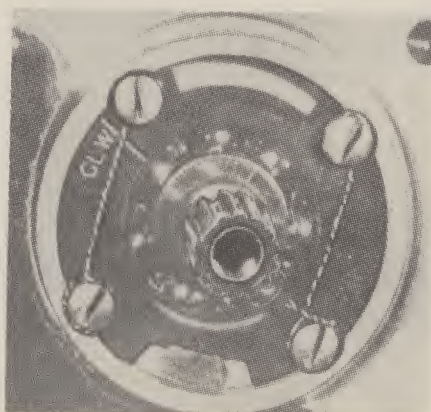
When reassembling the injection pump the wide spline at drive end of camshaft should be registered with mark "CLW" as shown.
